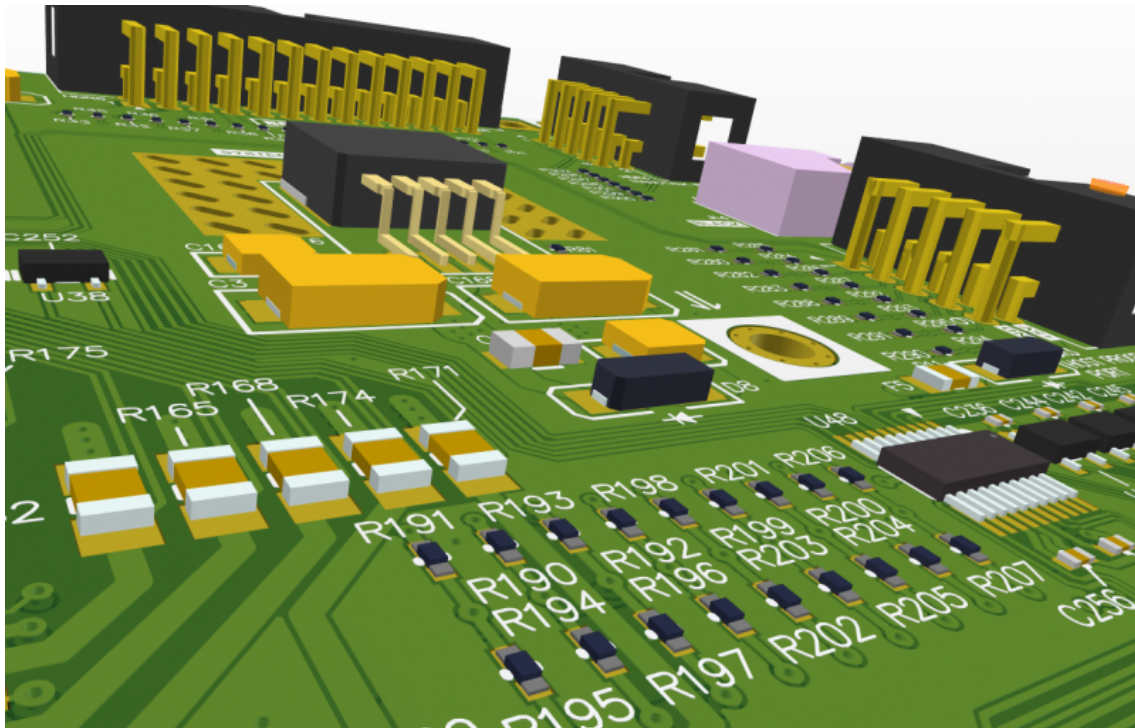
3D view of a finished PCB layout (Altium,2025)
